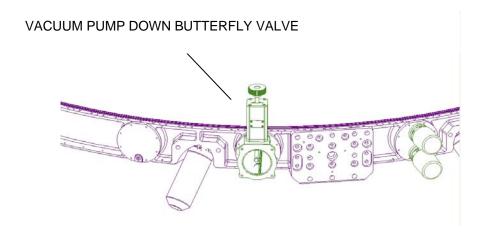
Lower Support Ring Magnet H/W (4 of 6)
